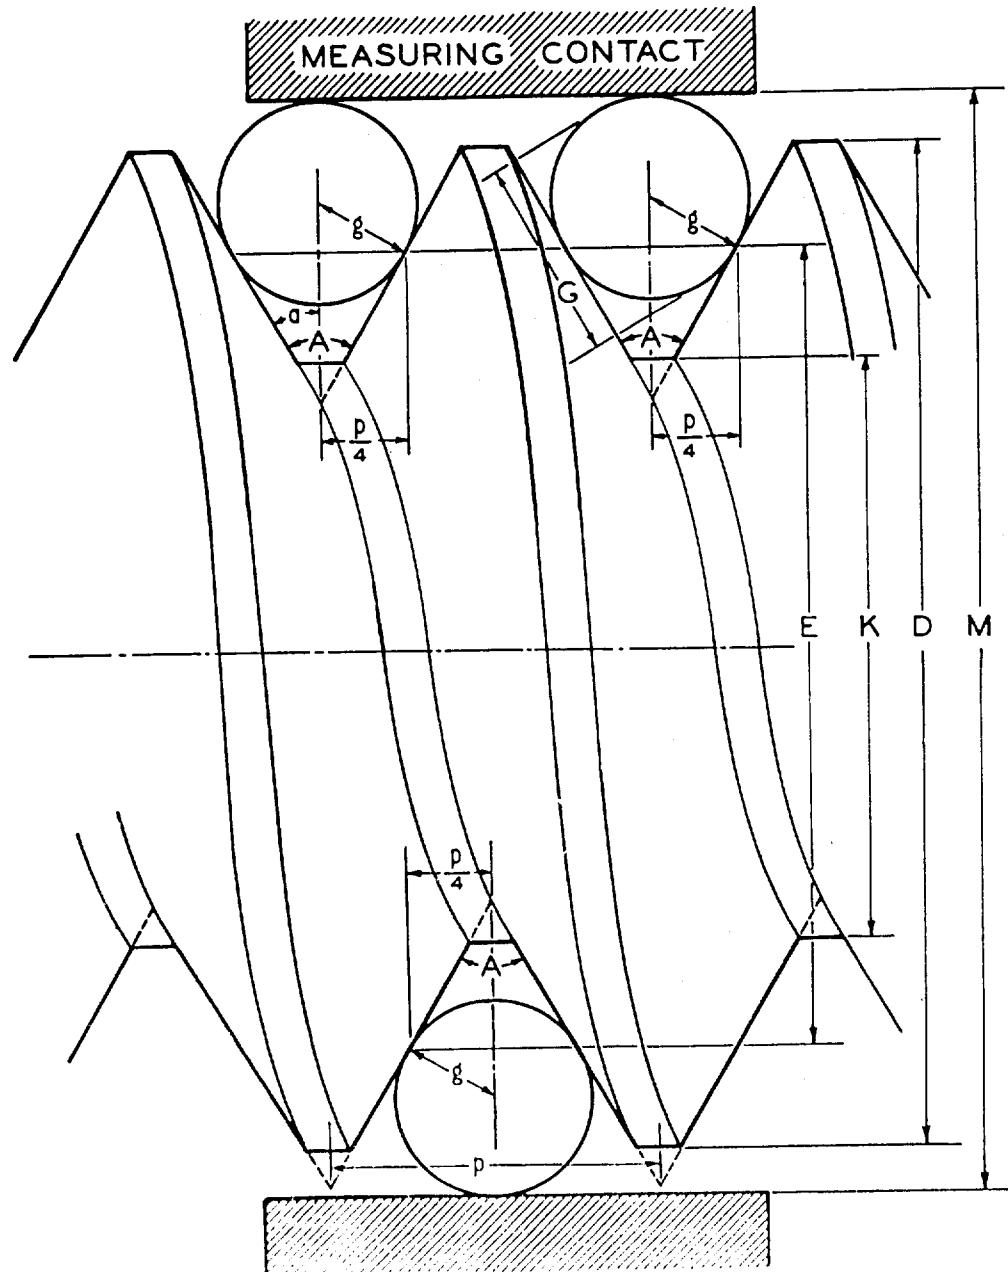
Three-wire method of measuring pitch diameter of thread plug gages.
